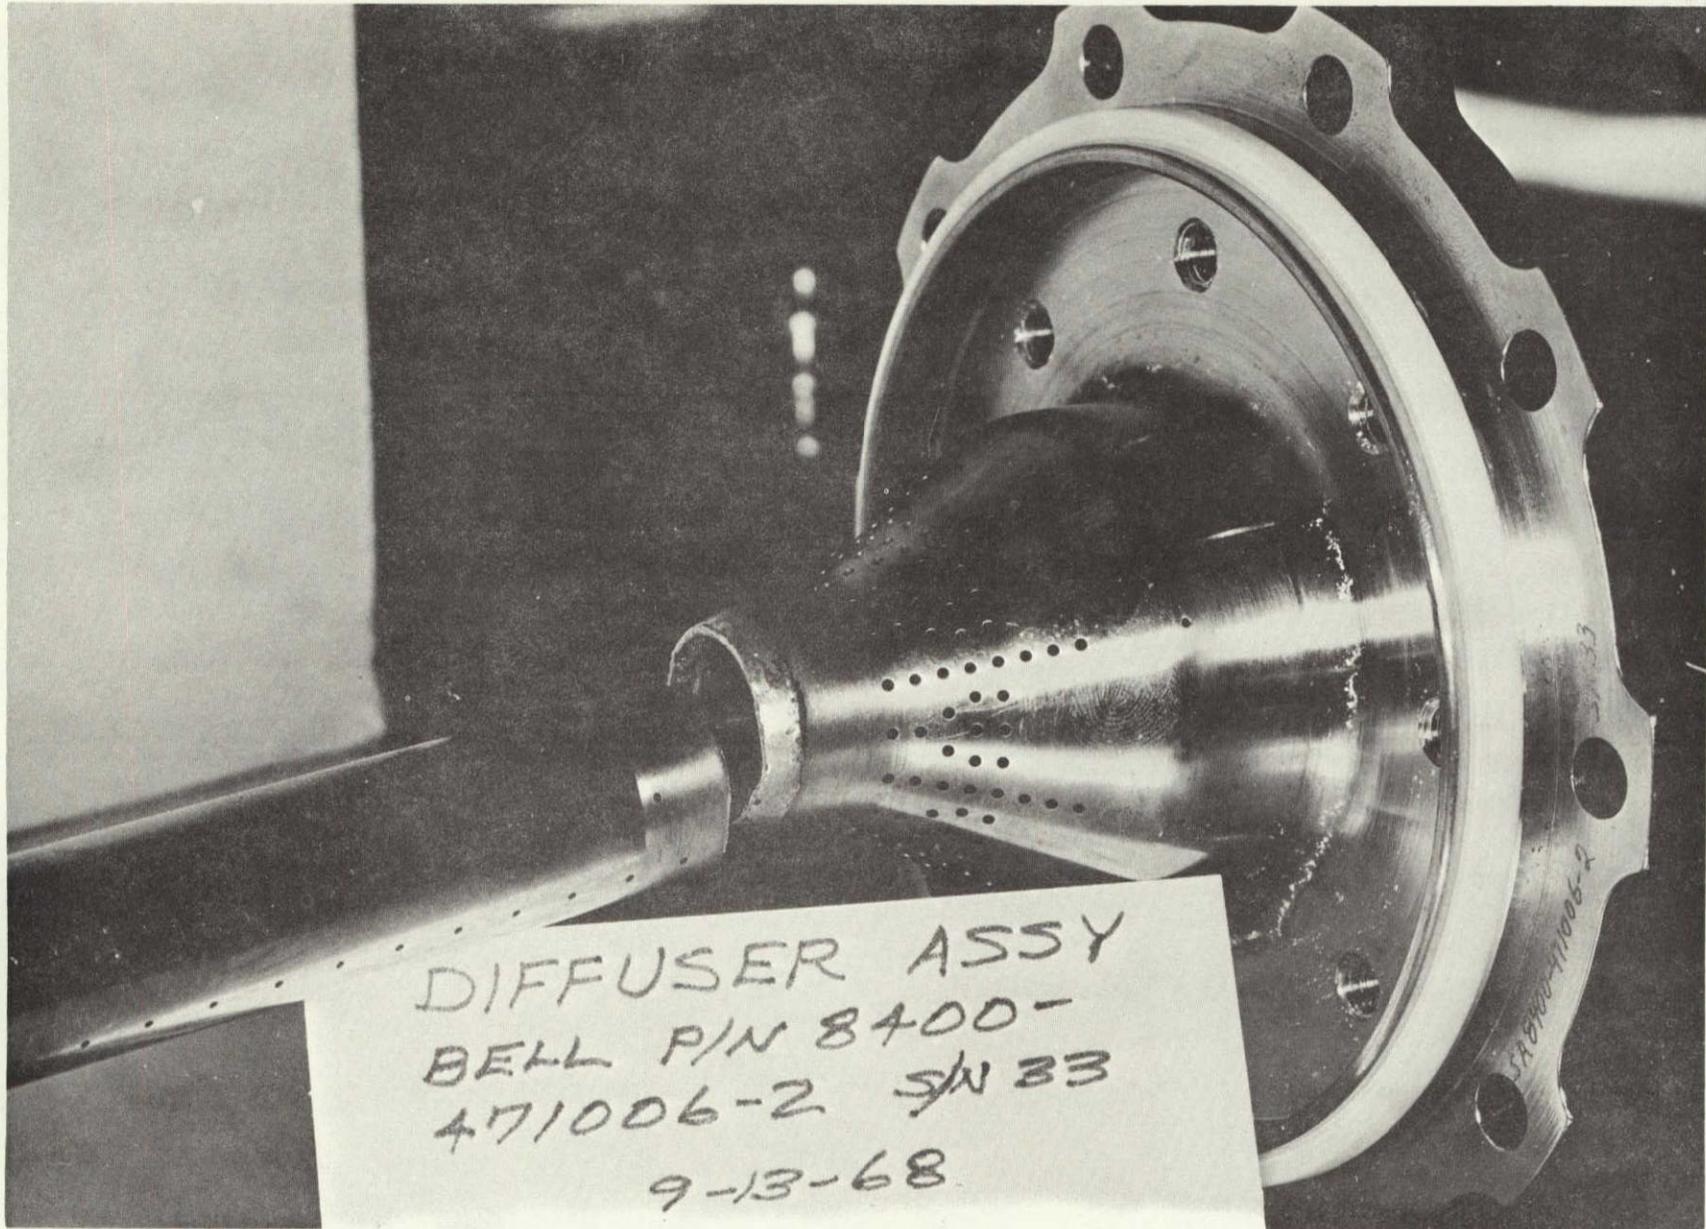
Oxidizer Tank Diffuser Tube (Sheet 1 of 2)
